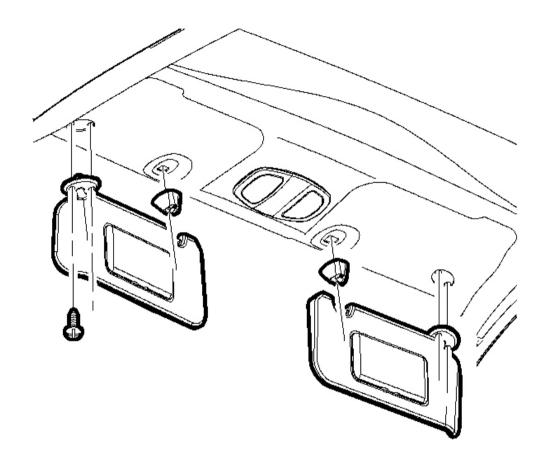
Removing/Installing Sunshade Retainers Courtesy of GENERAL MOTORS CORP.
